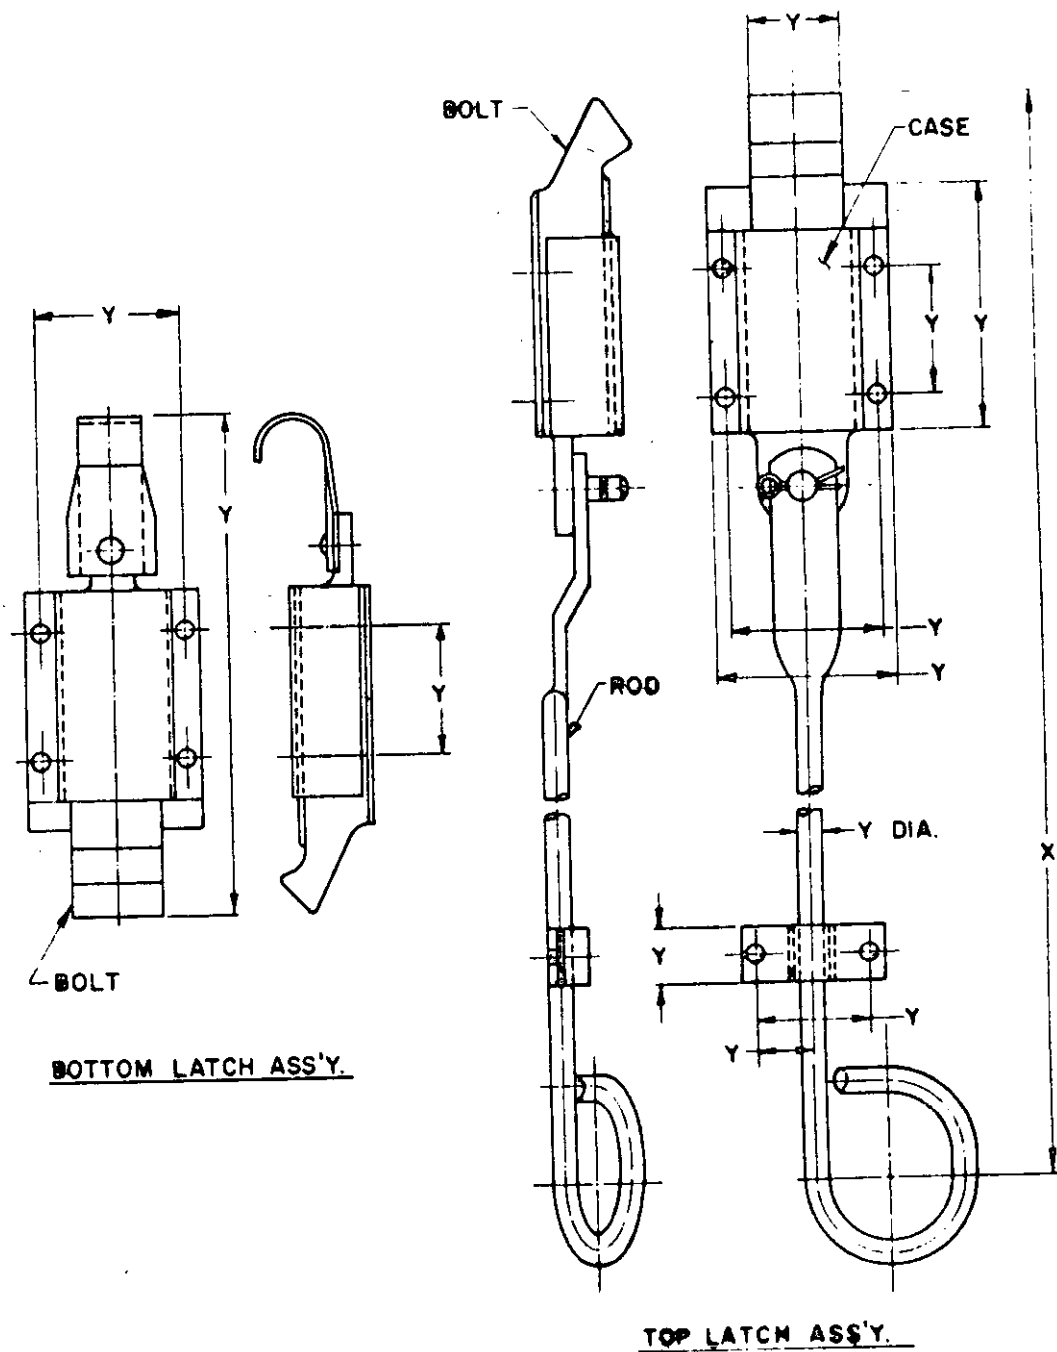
LOCK, DOOR, VAN — SLAM BOLT, TWO PIECES.
